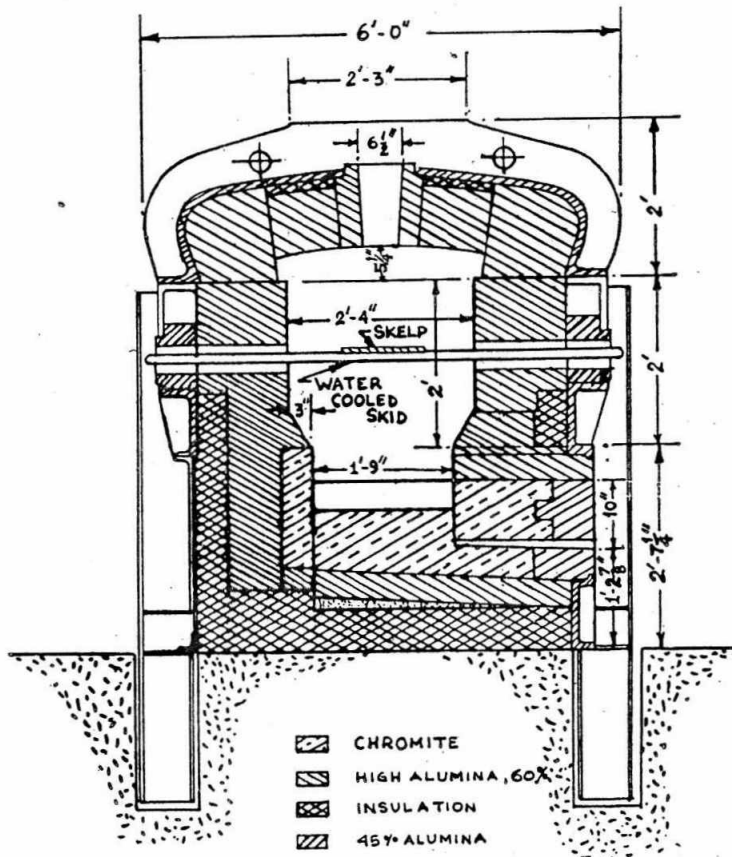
Cross sectional view of continuous weld mill furnace at Indian Tube Co. Ltd.
